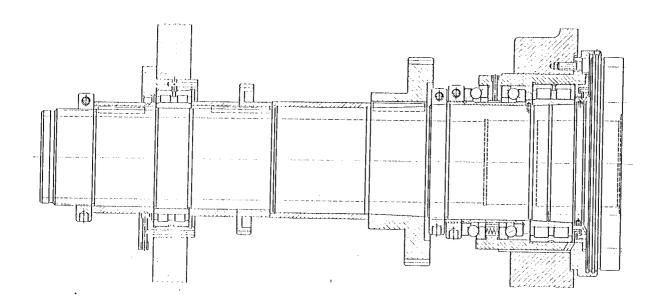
An NC-Lathe Spindle (Ref. 27)
